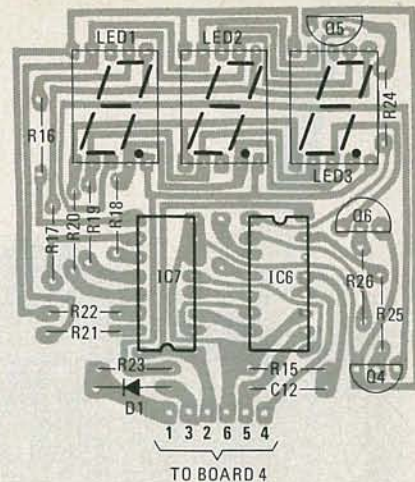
PARTS-PLACEMENT DIAGRAM for board 5 is shown here.
